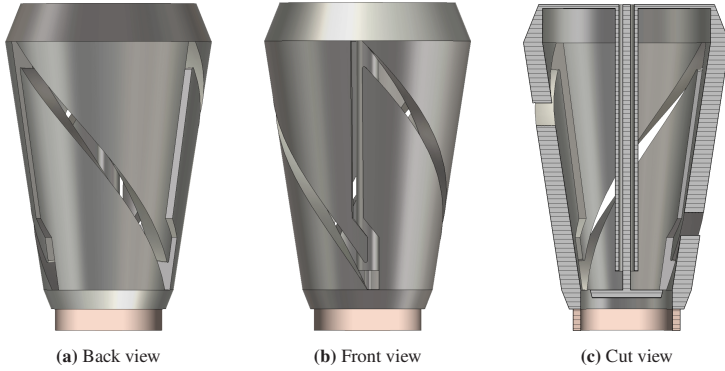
Improved version of the cylindrical design approach with back (a), front (b) and cut view(c).
